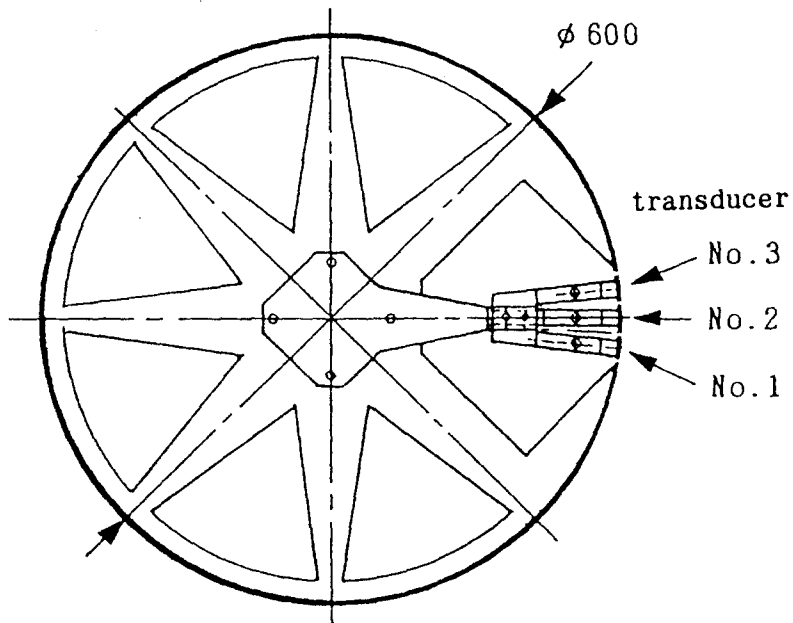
Schematic view of rim sectional transducers installed to a tested wheel
